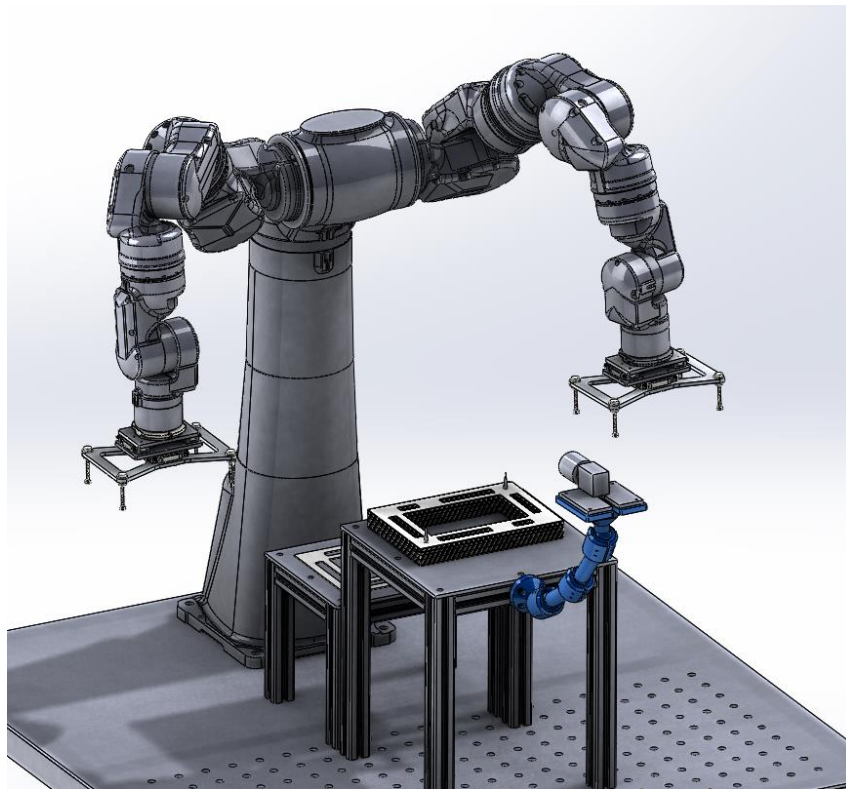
Workcell final design with staging table (center left, smaller), alignment table (center right, taller), and SwivelLink® camera mount.
